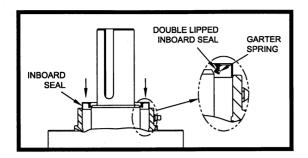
Orientation of Inboard Seal for Installation
